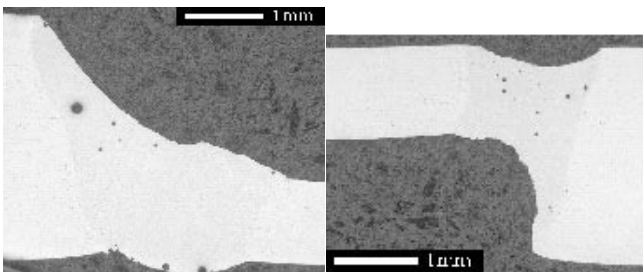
Cross-sections of welds welded from the step side and flush side.
